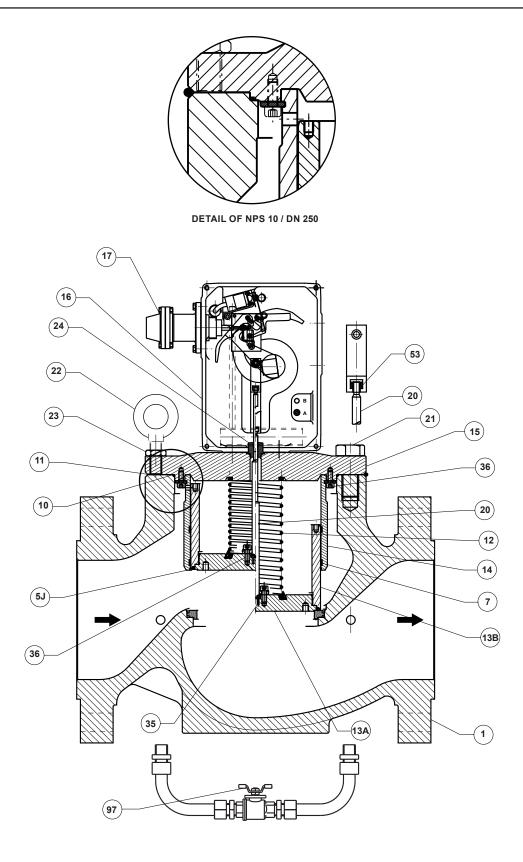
Type OSE Slam-Shut Valve Assembly for NPS 8 and 10 / DN 200 and 250
